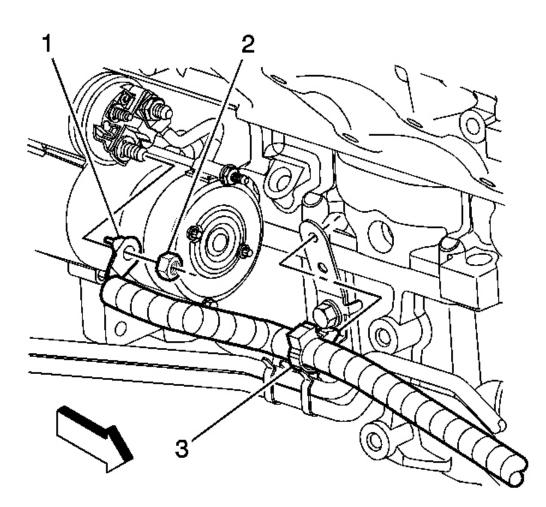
View Of Positive Cable Lead, Nut & Cable Clip Courtesy of GENERAL MOTORS CORP.
